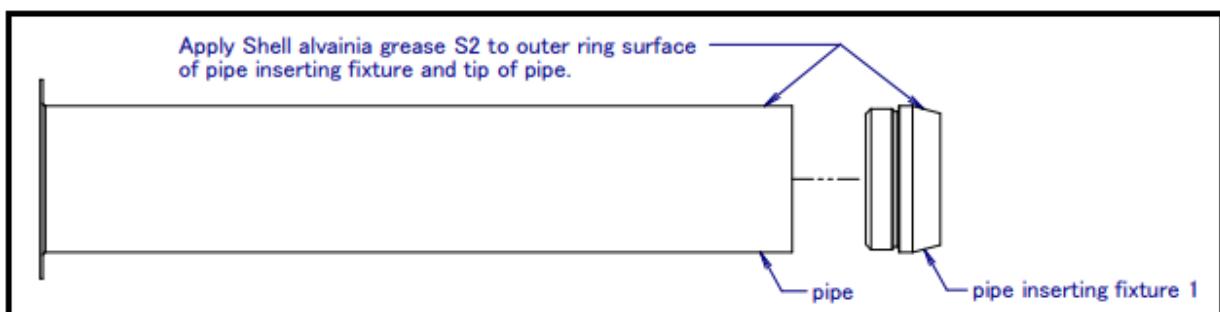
(g) Replacing the J4-axis gearbox, assembling pipe inserting fixture 1
